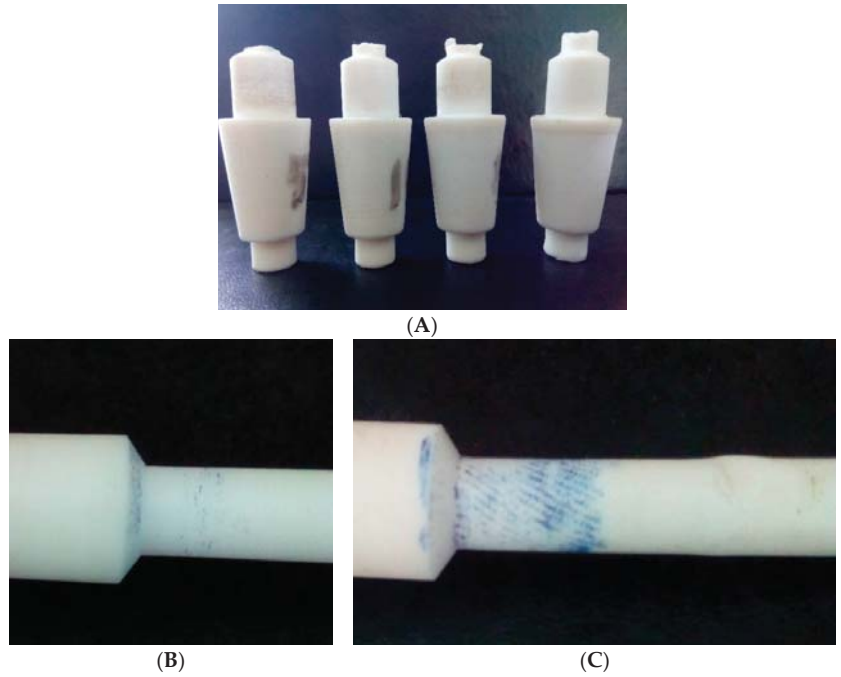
(A) Typical fractured heads showing debris of the cylindrical body, fresh specimen (B), tested specimen after certain cycle's period (C).
